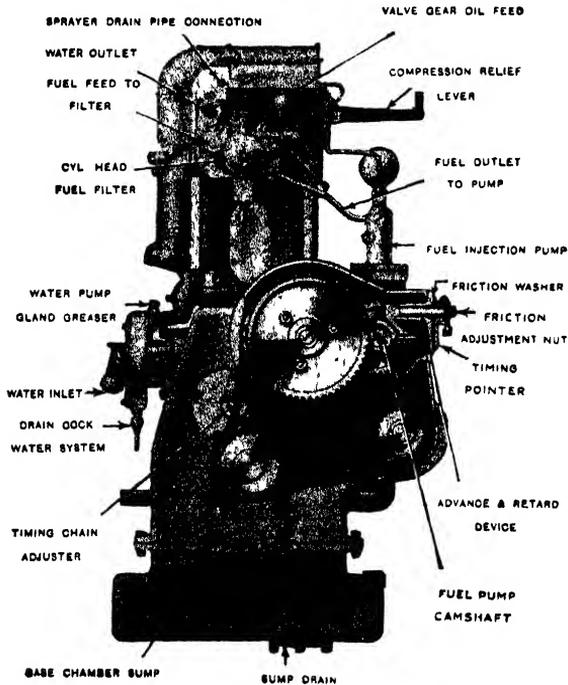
Rear End View of Gardner Four-cylinder Engine
